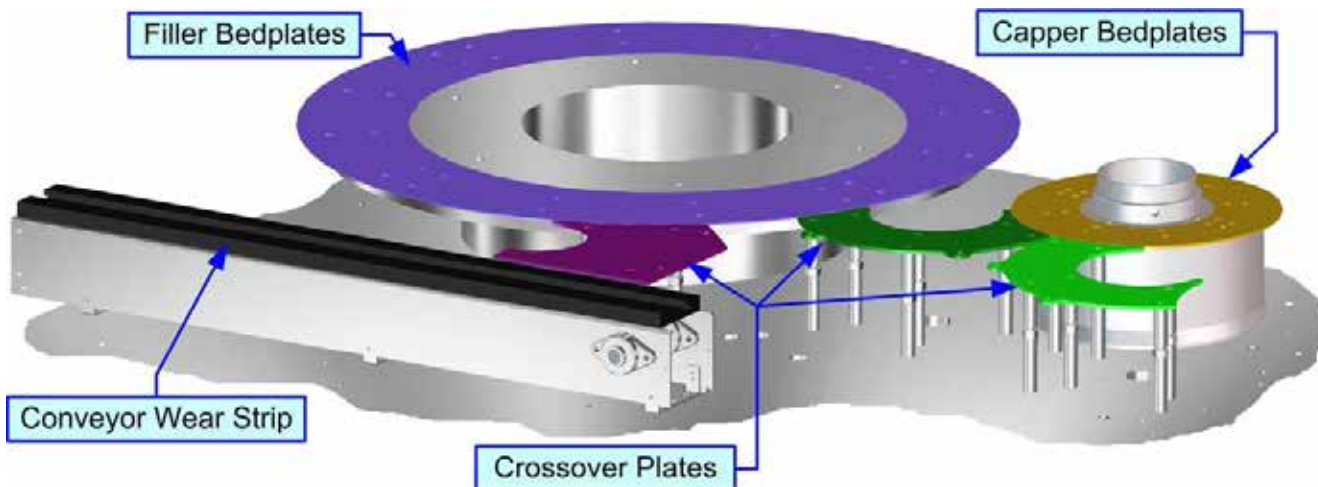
Crossover Plates, Bedplates, and Conveyor Wear Strips
